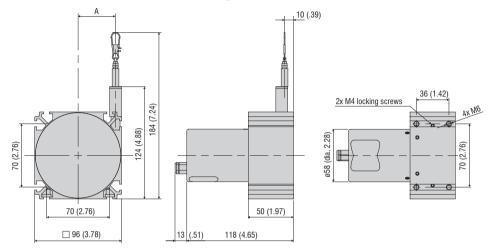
Dimensional drawing WDS- ... - P96 - CA - P, dimensions in mm (inches)
